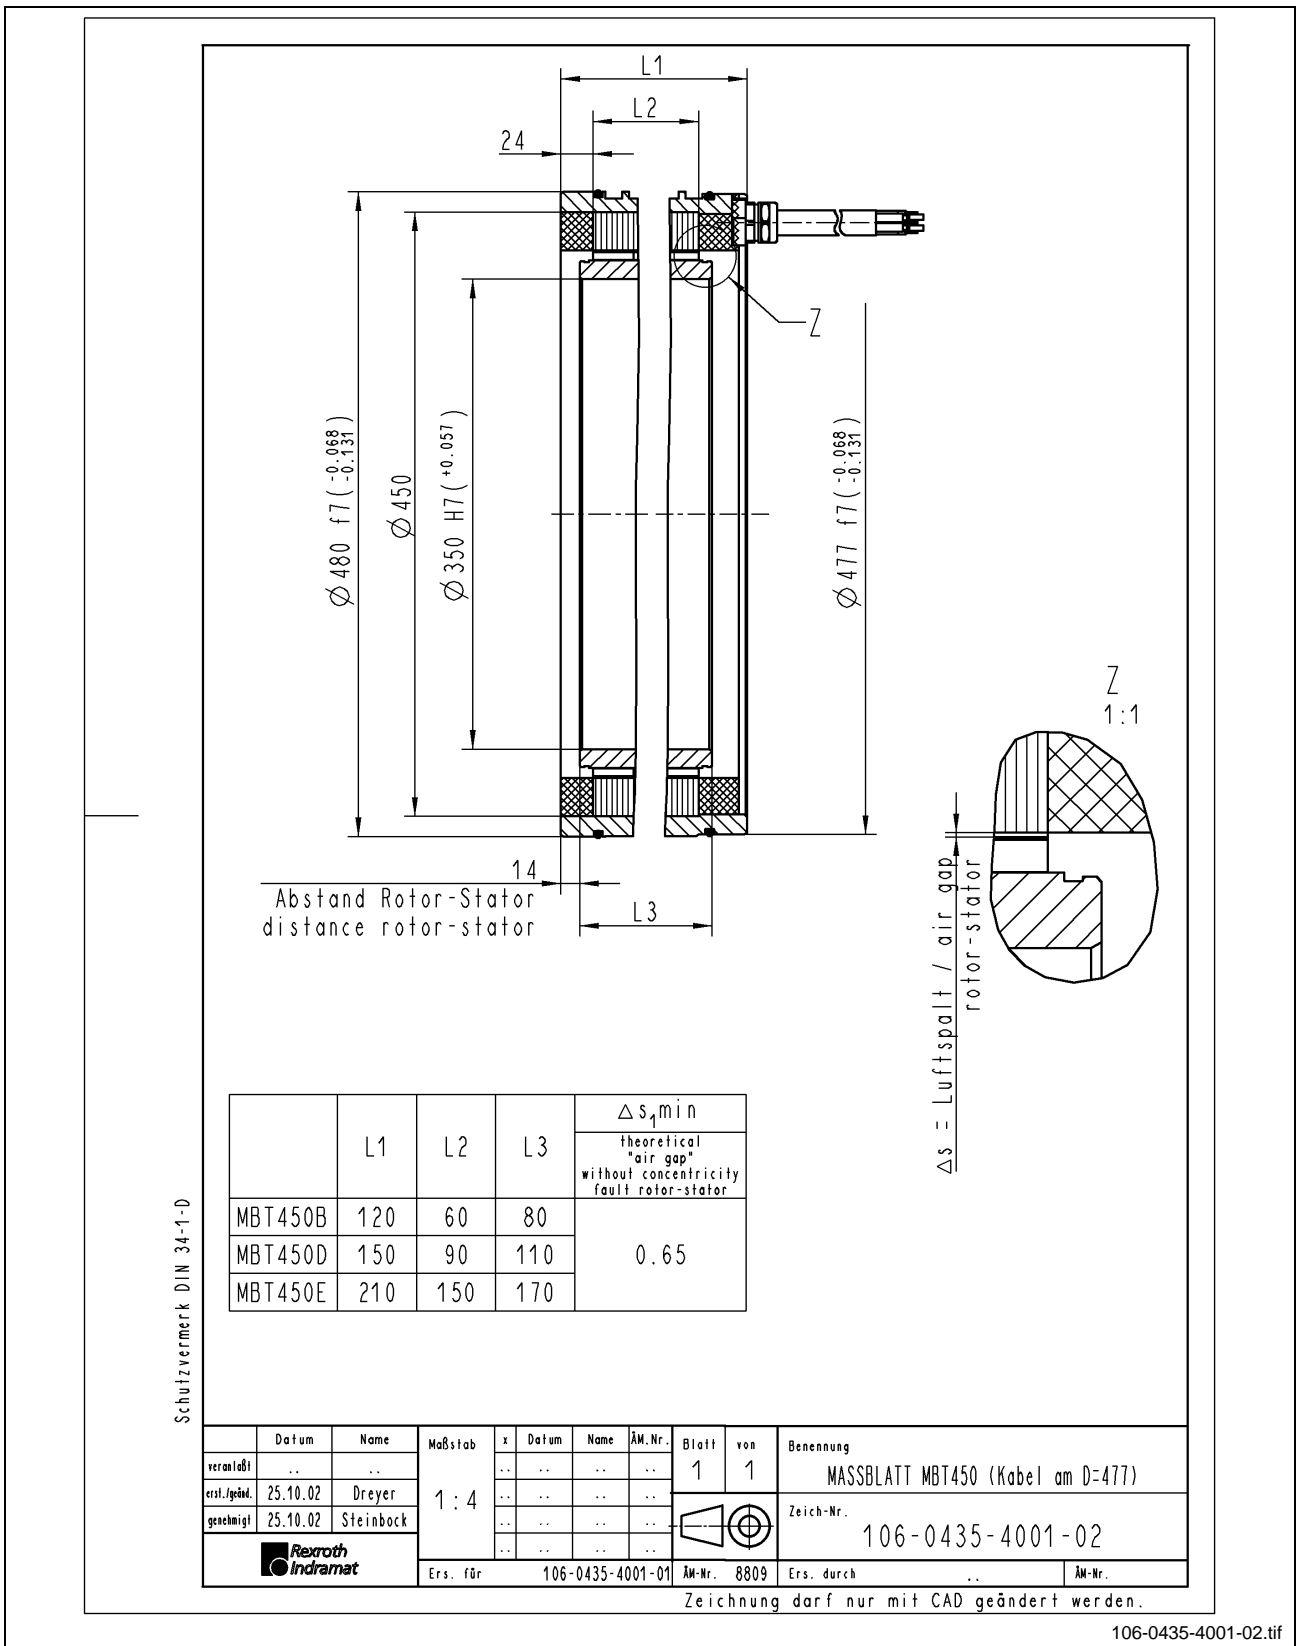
Dimension sheet size 450, electrical connection "SN"
